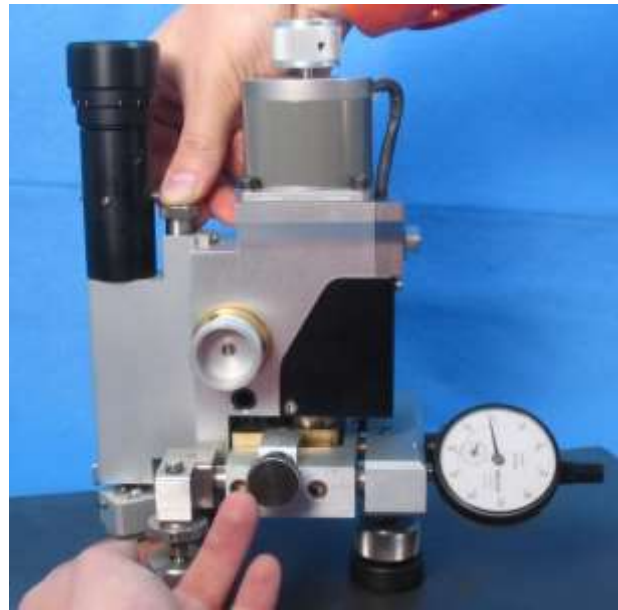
Inserting the alignment end mill (1-SINTCTC)
